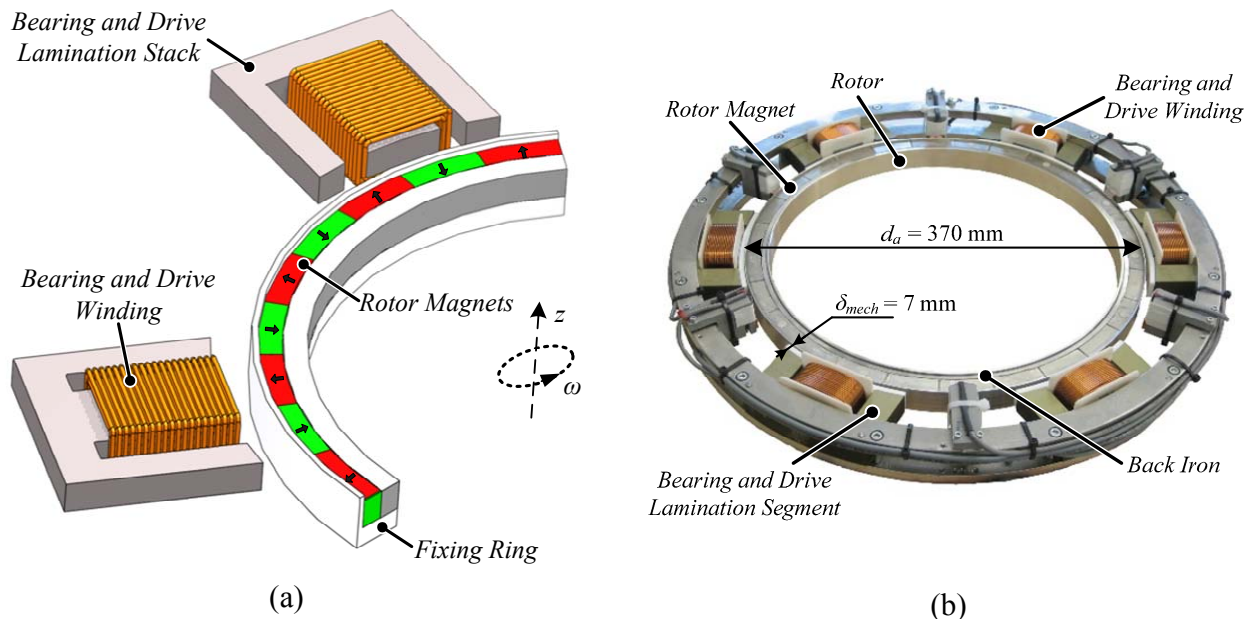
(a) Schematic cut view through the Bearingless Segment Motor (BSM) and (b) picture of the laboratory prototype.
